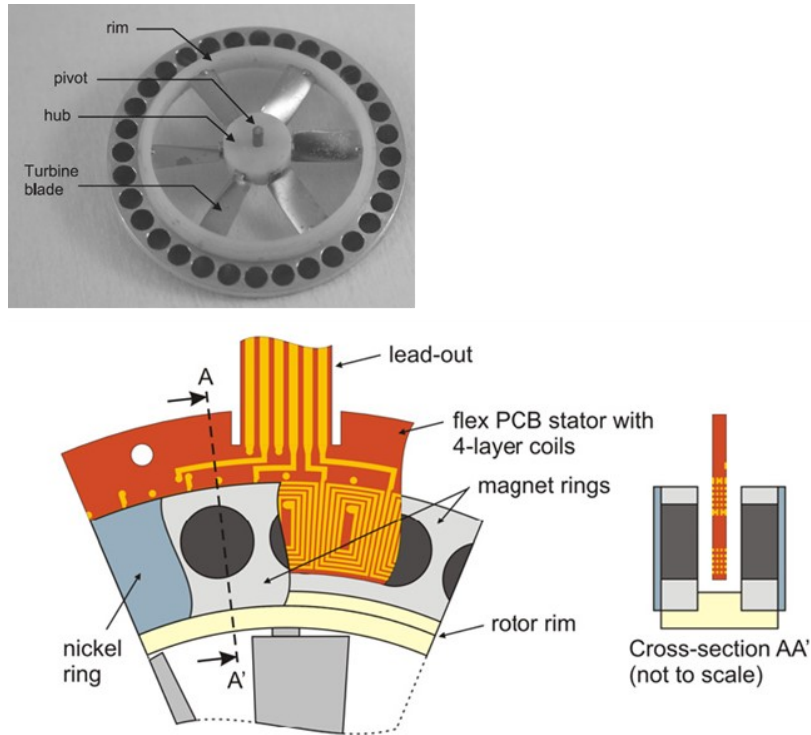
(a) Turbine Rotor with Assembled Magnet Ring; (b) Stator Coil Printed Circuit Board (PCB); (c) Cross-section View of the Rotor and Stator Arrangement [6]
